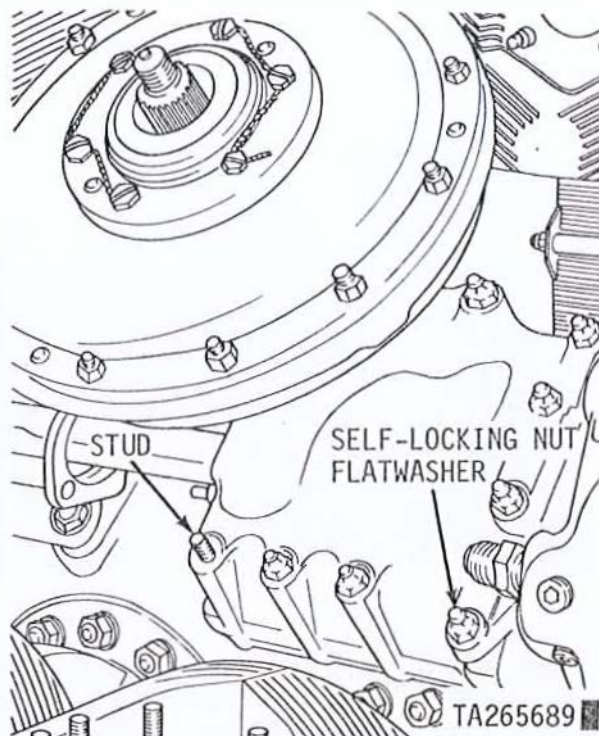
Removing or installing front fan drive housing attaching parts — front view.
